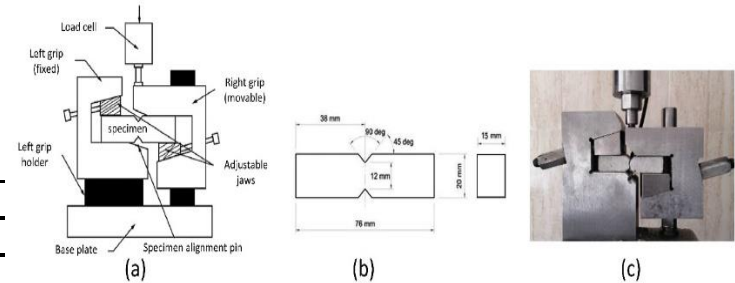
Schematic view of the shear test set-up (a), the specimen dimensions (b), and a specimen after the shear test (c).
